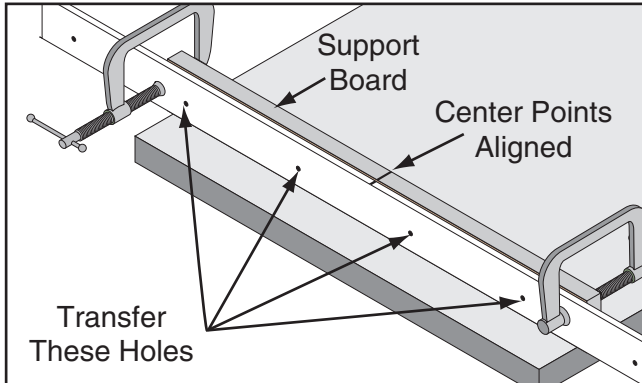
Fence and board lined up and clamped to transfer screw hole positions.
